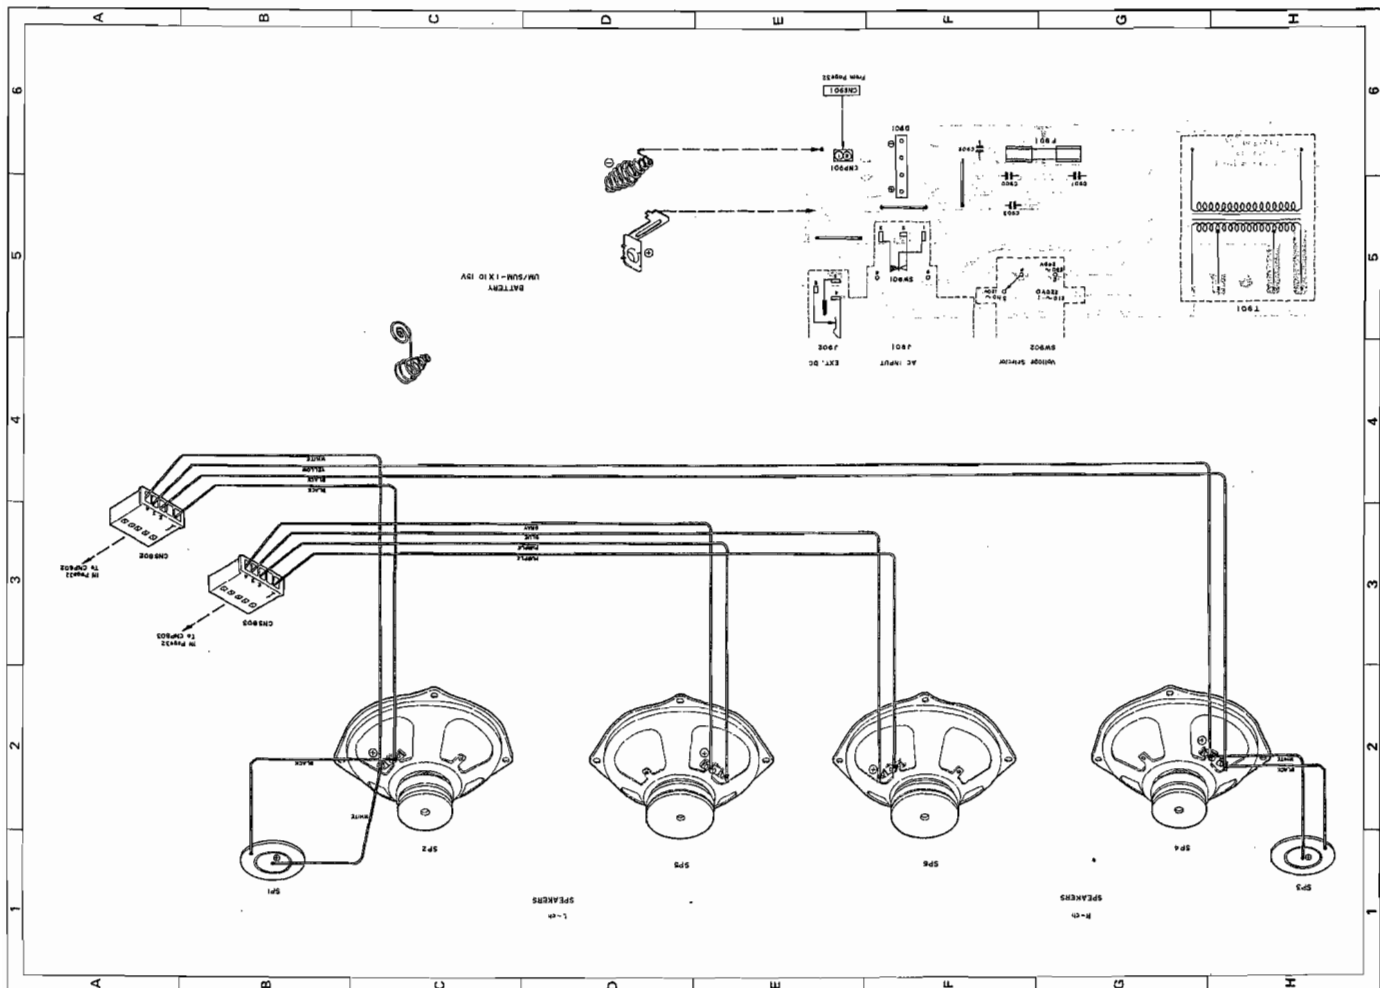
WIRING SIDE OF P.W. BOARD (6/6)
